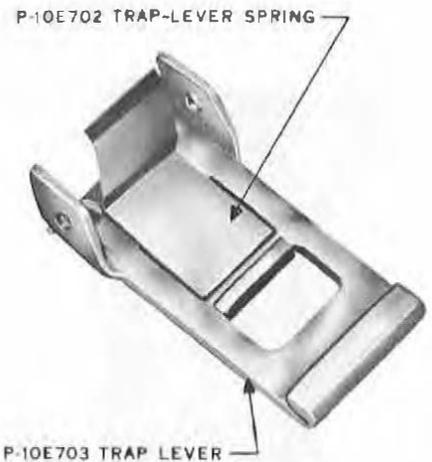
Trap-Lever Spring Assembled on Trap Lever
